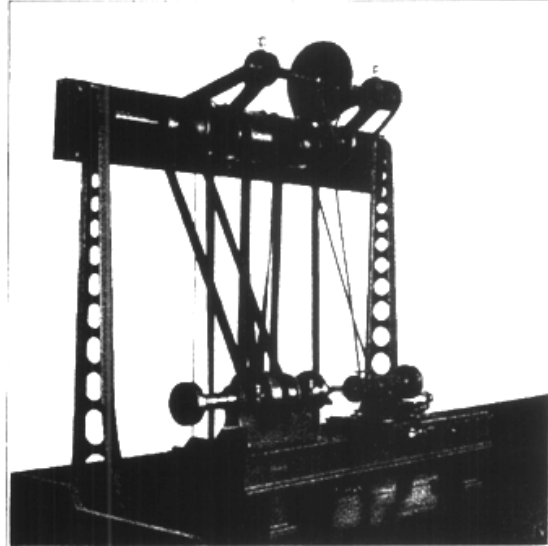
Rivett Series 507 lathe, external grinding attachment, on bench with Countershaft Plank Supports, Wall Countershaft with Grinding Countershaft Attachment, ball-bearing
